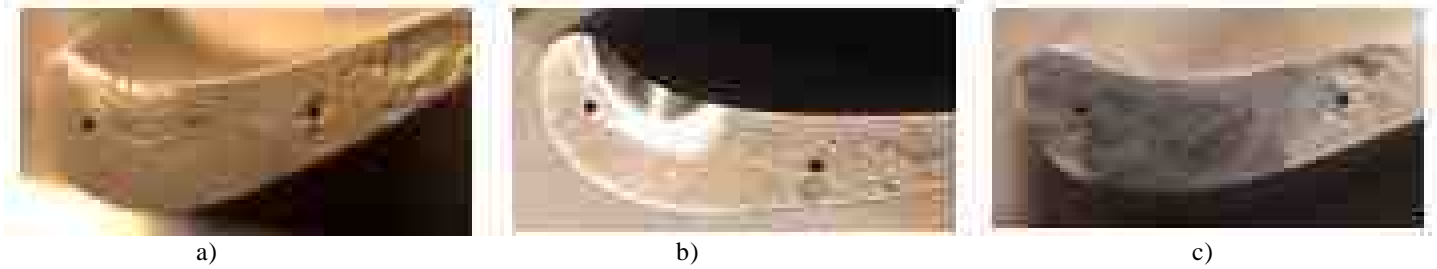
Repair of single-crystal turbine blade by ESD, showing a) as-received blade with thermal fatigue cracks, b) cracks removed by grinding, c) restored by ESD using original material as filler and finished. (Photos courtesy Advanced Surfaces & Processes, Inc.)
